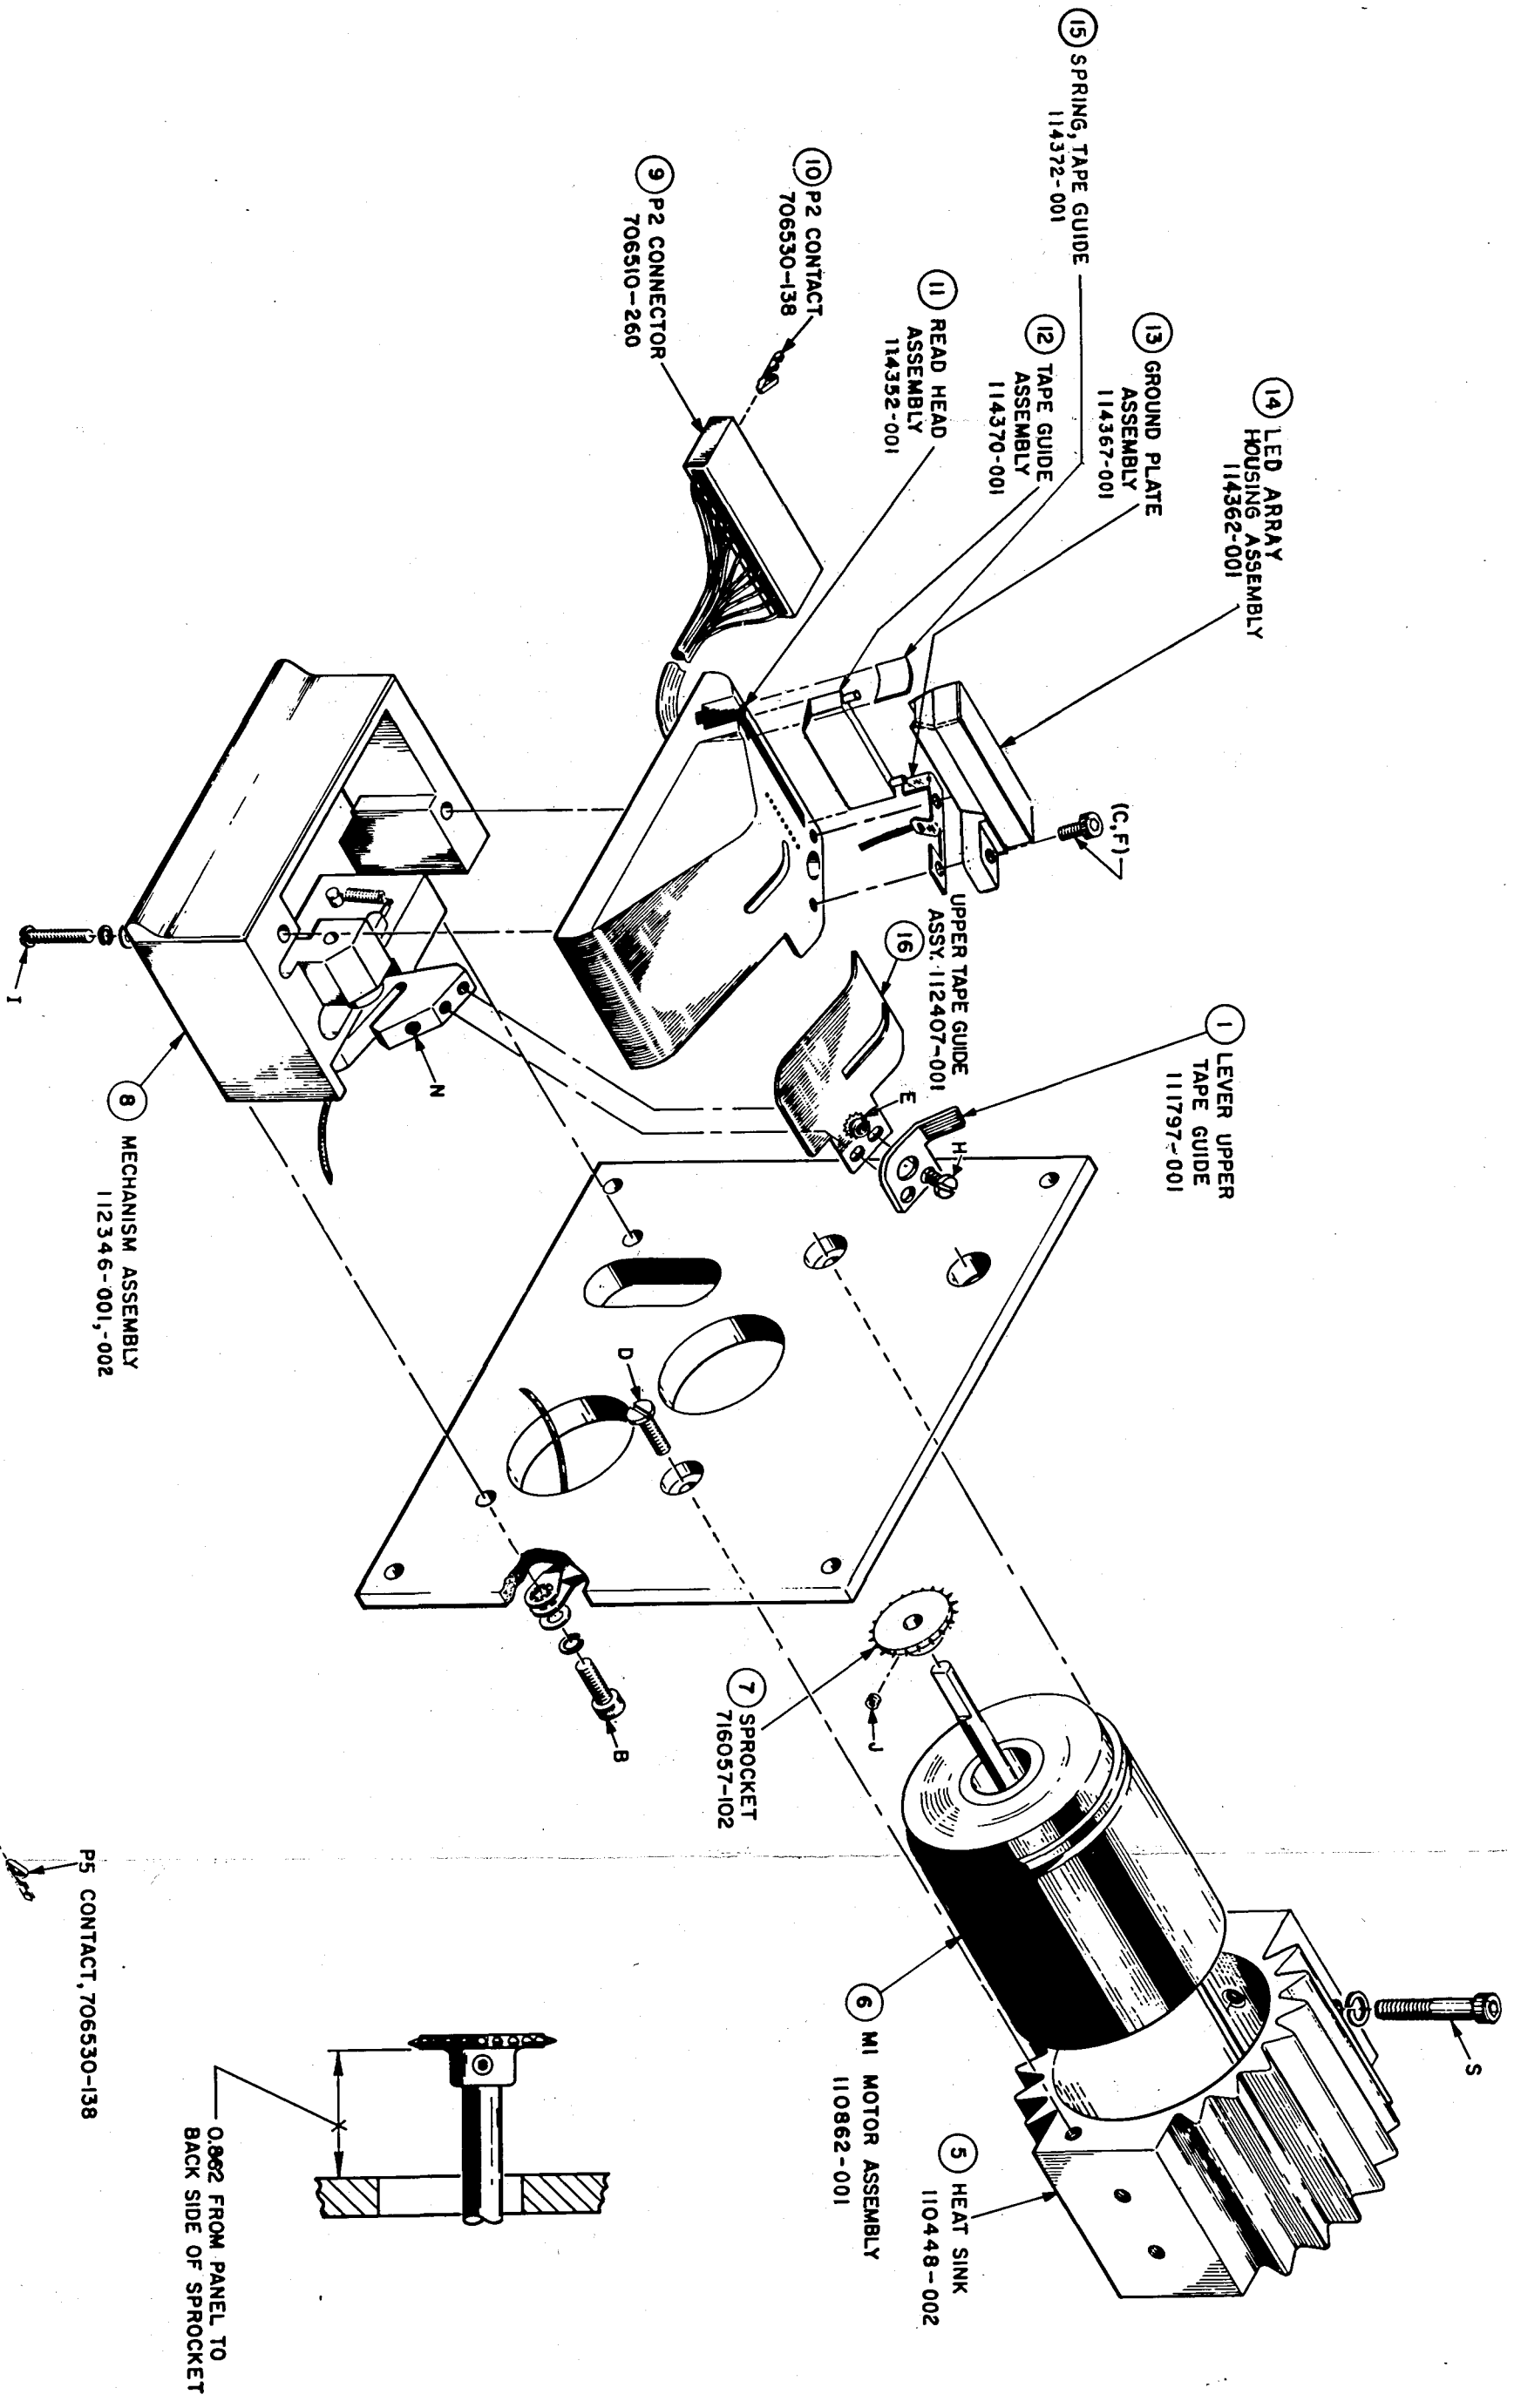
Readhead Mechanism & Step Motor Assembly Exploded View.
